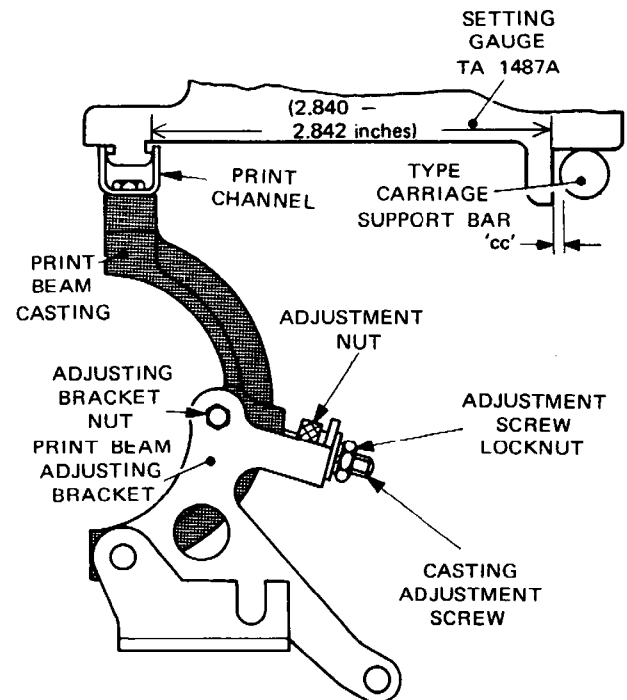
PRINT BEAM CASTING AND PRINT CHANNEL
